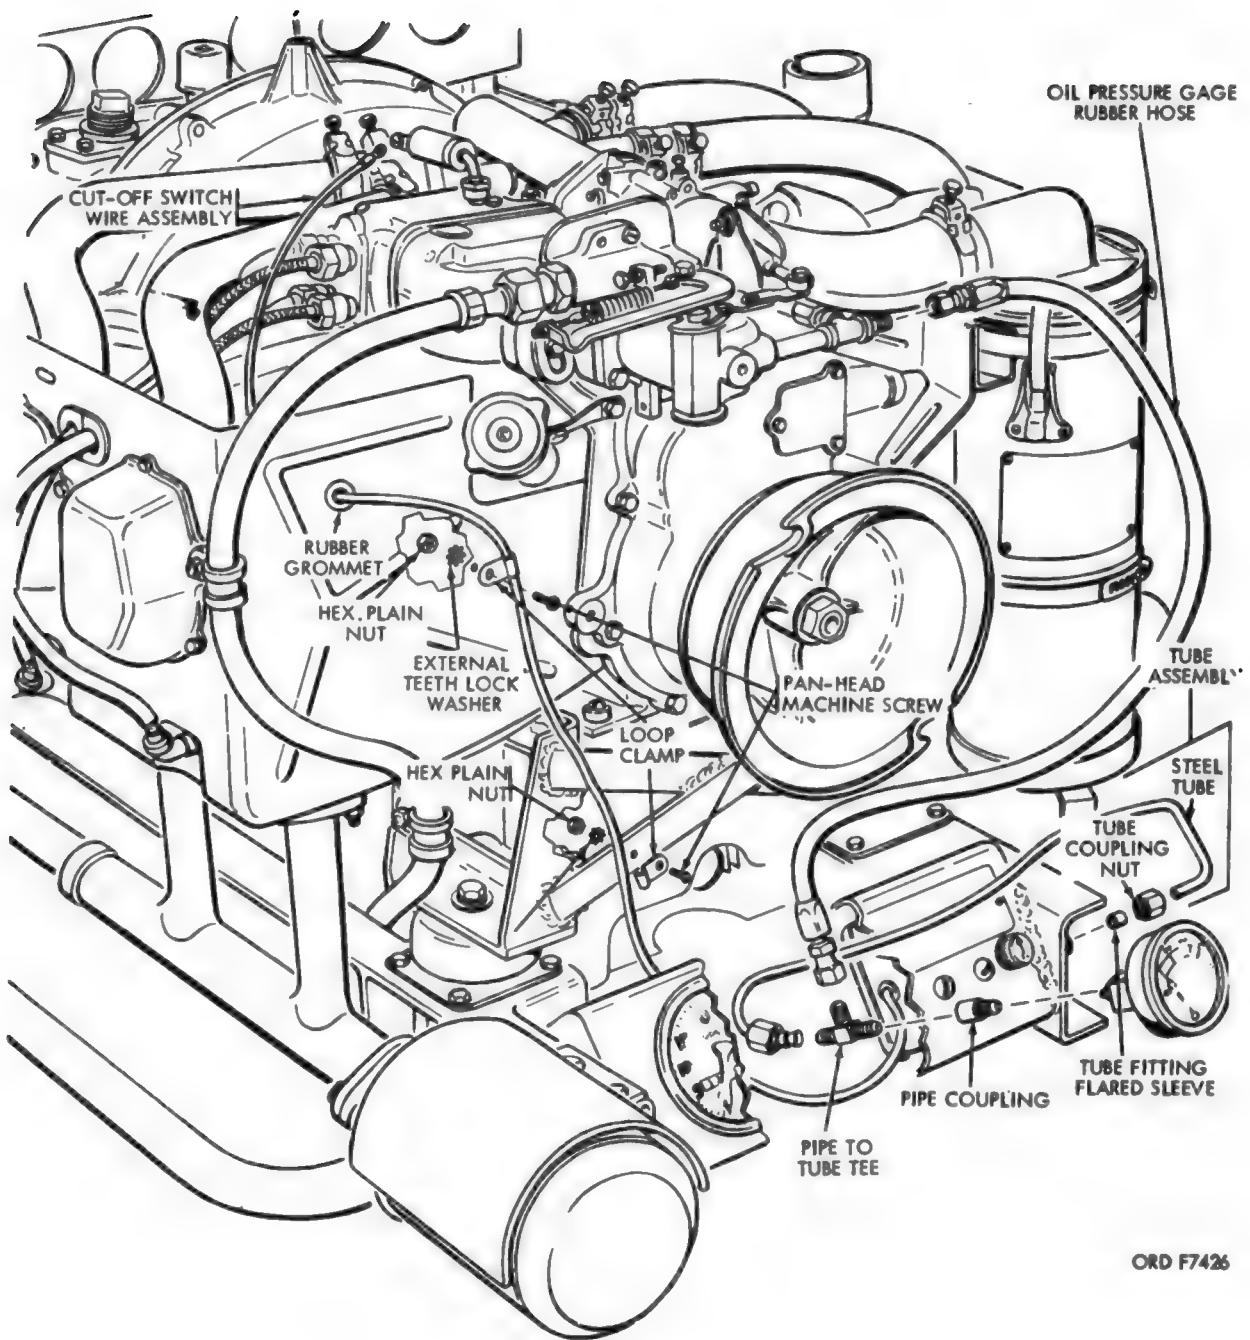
Removal or installation of oil pressure gage hose, tube assembly, and cut-off switch wire assembly.
